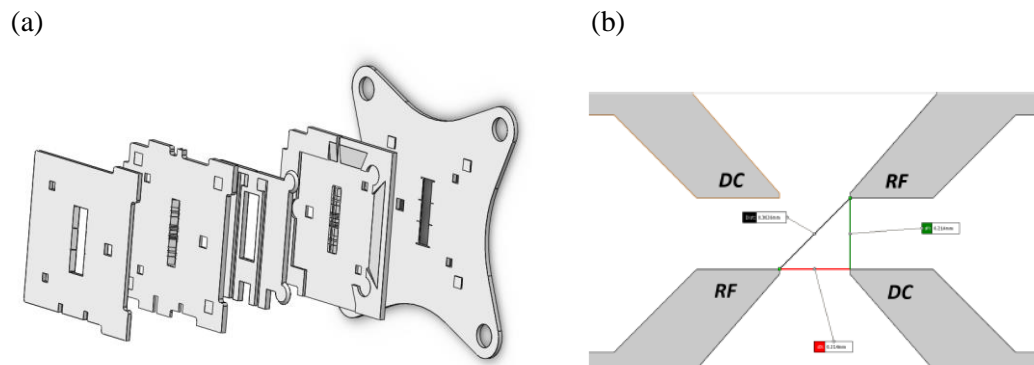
(a) Exploded view for the five wafer stack. (b) Side cut of RF and DC electrodes
